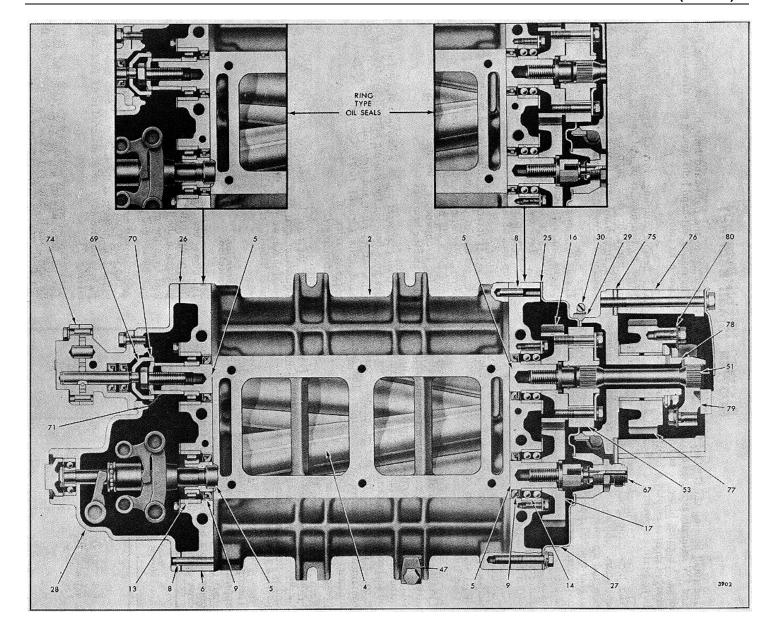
Blower (Small Bearing) and Drive Assembly and Accessories Attached to Blower
